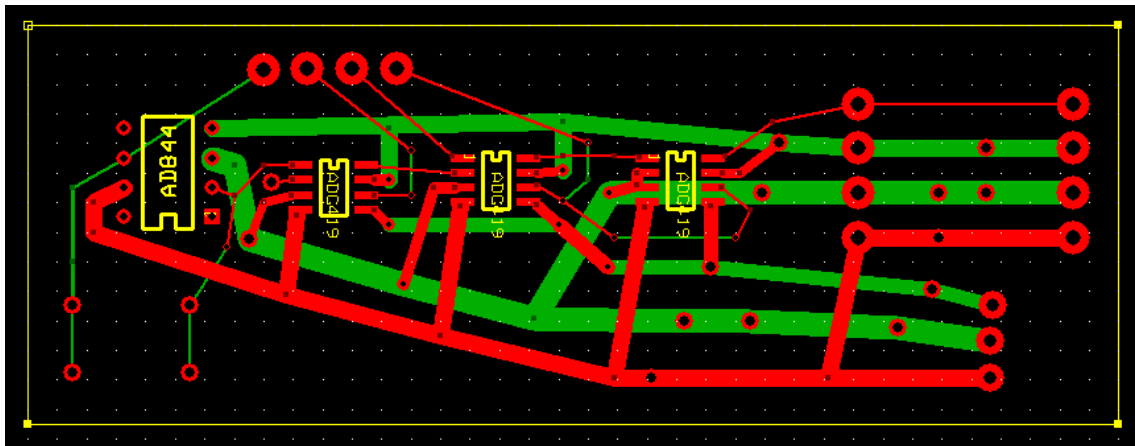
Printed circuit board drawing of three separate switches as in figure A.1b
